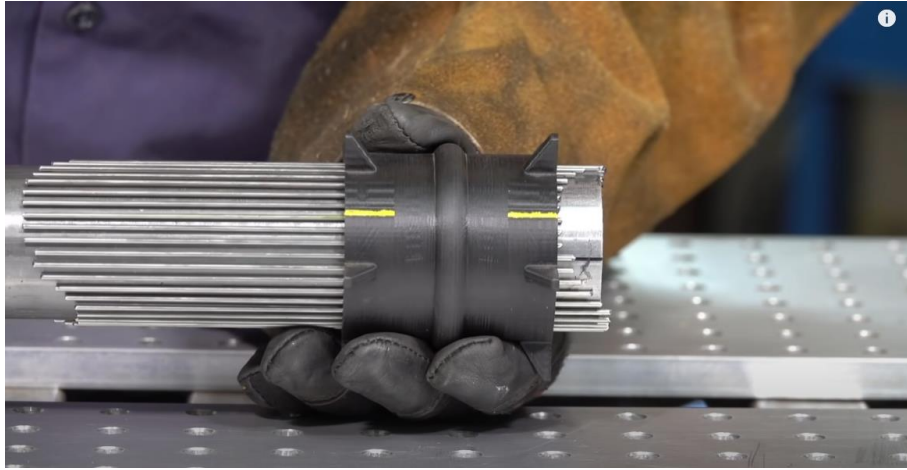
Example of tube notching template tool, allowing the tube profile to be traced onto the end of the tube [139]
